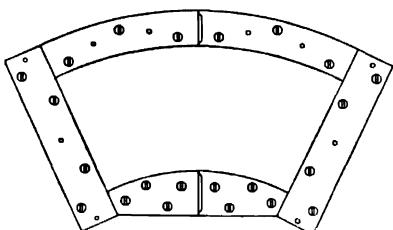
SECTIONALLY CONSTRUCTED DIE SET.
